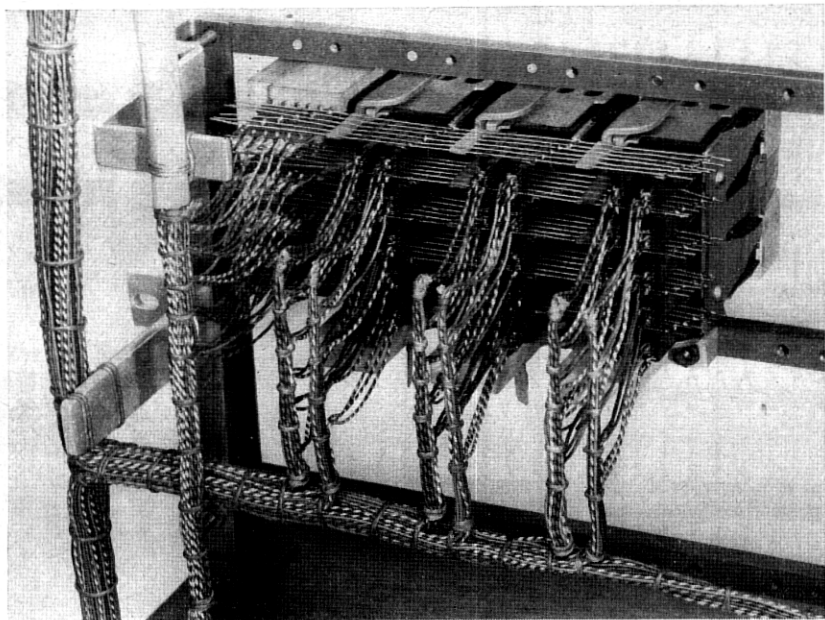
New 30-contact relays showing multiple wiring by the new ladder type strapping method, and the new solderless wrapped cable connections.
